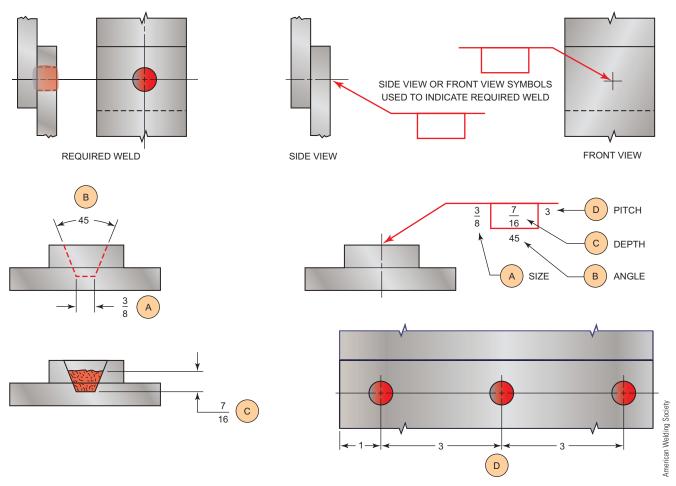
Applying dimensions to plug welds.
